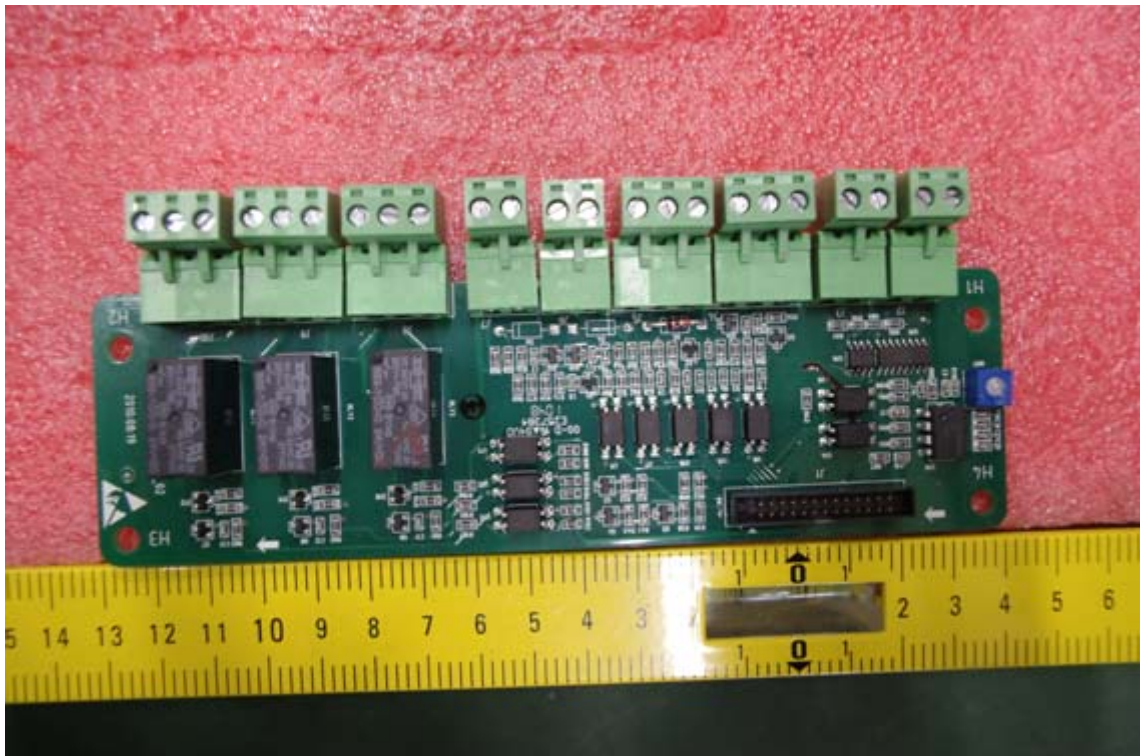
Board SNT\_PCB\_3320\_GJ, component side view
